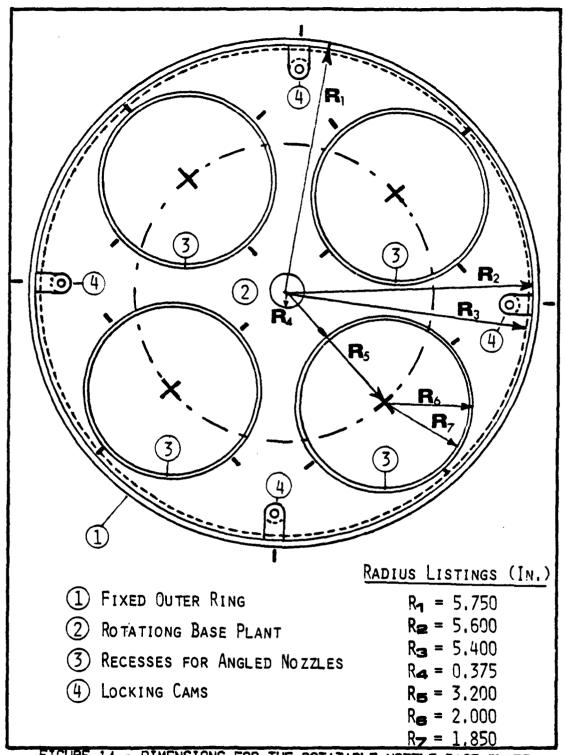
DIMENSIONS FOR THE ROTATABLE NOZZLE BASE PLATE
